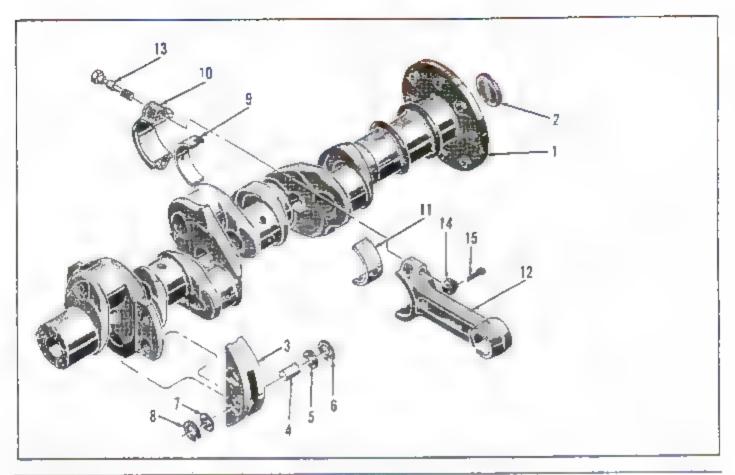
Crankcase Subassembly Procedure (Sheet 2 of 2)
